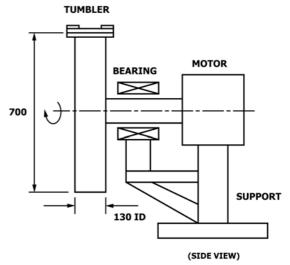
Example of I-Type Coke Tumbler (Dimensions in mm)
